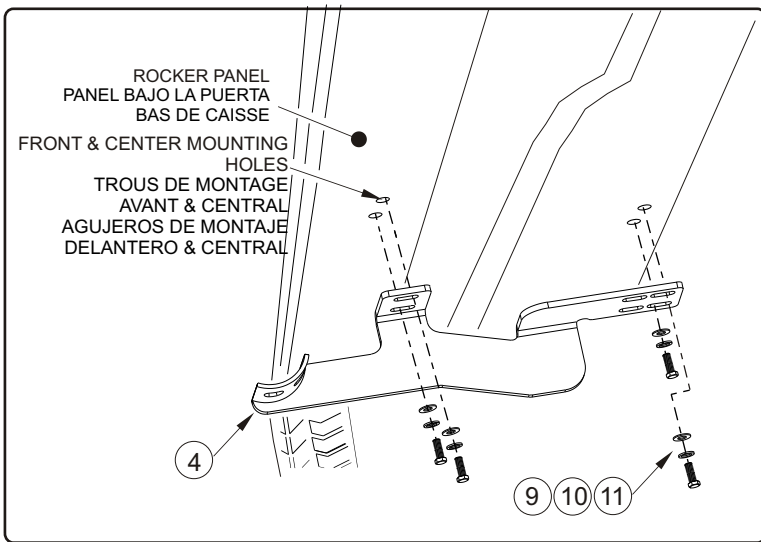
FRONT & CENTER, DRIVER SIDE SHOWN
